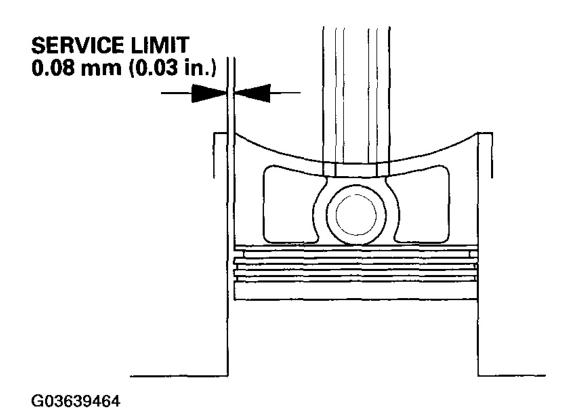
Calculating Difference Between Cylinder Bore Diameter And Piston Diameter Courtesy of AMERICAN HONDA MOTOR CO., INC.
